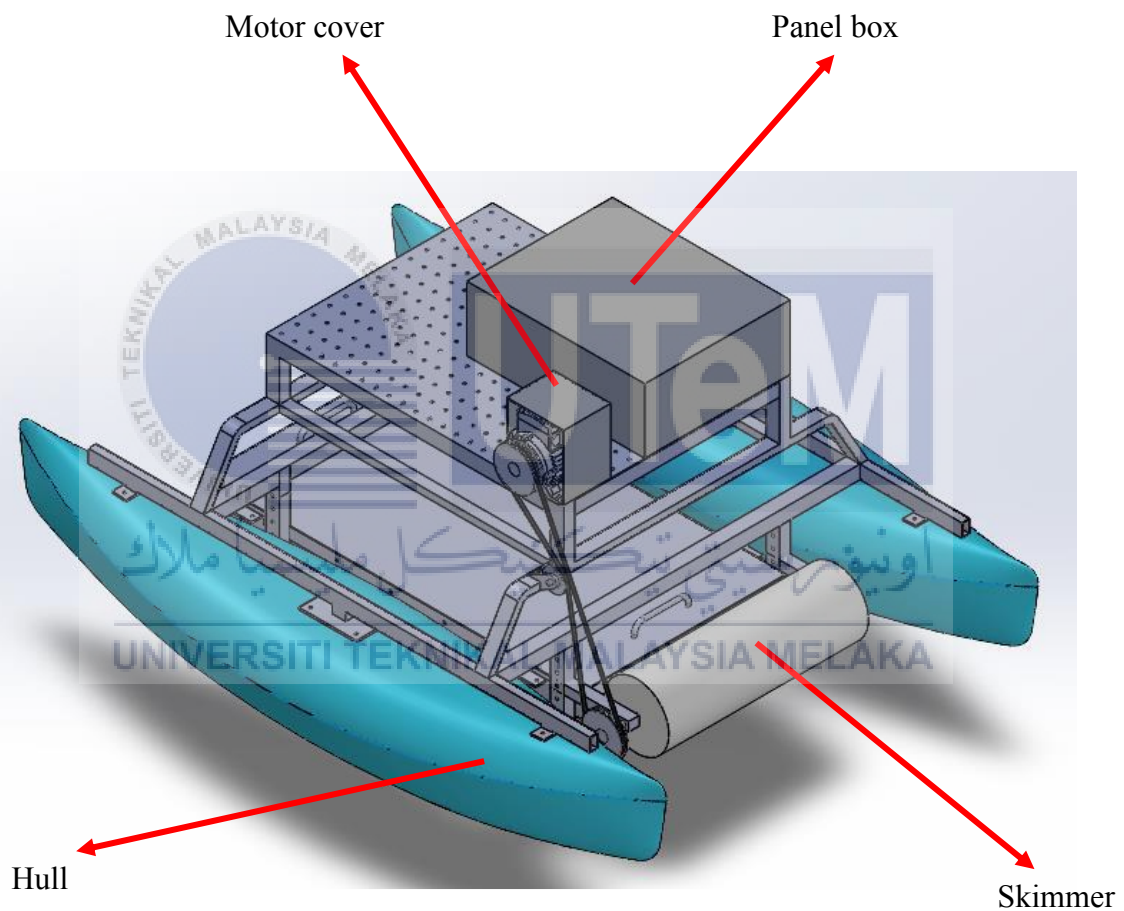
Final 3D Design of Improved Portable Oil Spill Skimmer
